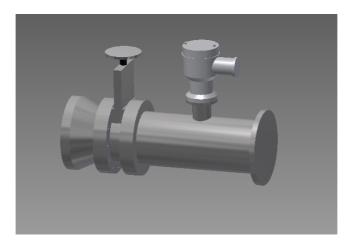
3D CAD drawing of component assembly, after Coanda intake.
